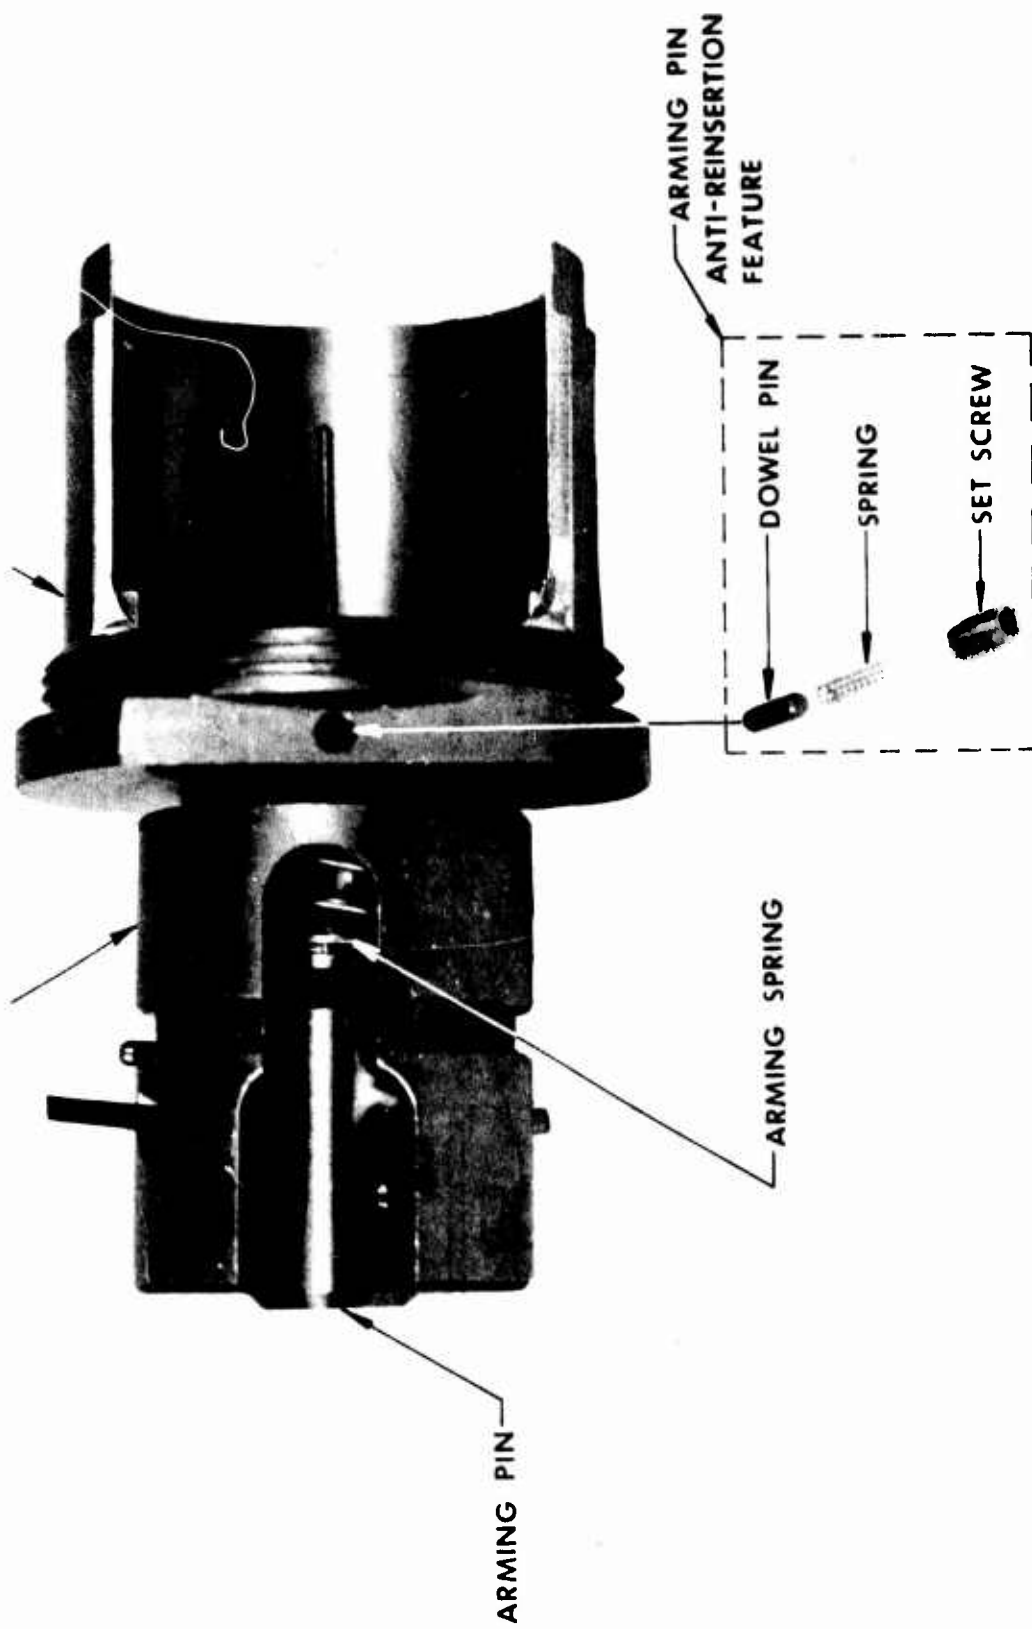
Cutaway View of Case and Arming Collar Assembly.
